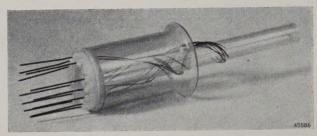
Exhaust tubes can be welded in simultaneously with the fusing of the lamp or valve base.
